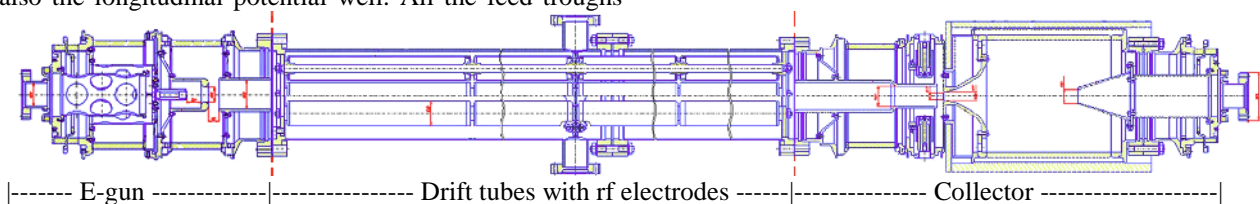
BRIC set-up assembly design, without the solenoids for the electron beam focusing.
